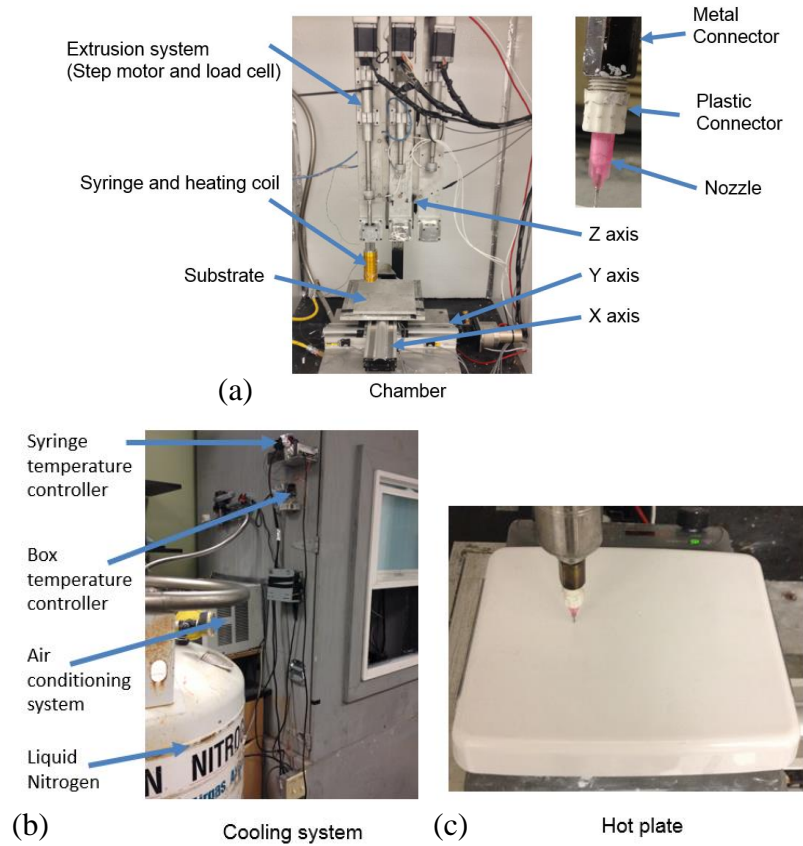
Experimental setup of the machine: (a) overview of machine, (b) the cooling system and (c) the hot plate
